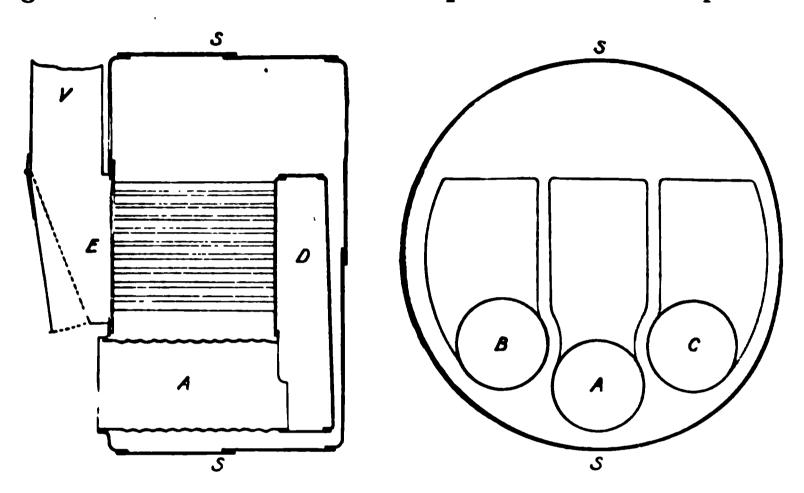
SINGLE ENDER MARINE BOILER, THREE FURNACES, THREE COMBUSTION CHAMBERS.
